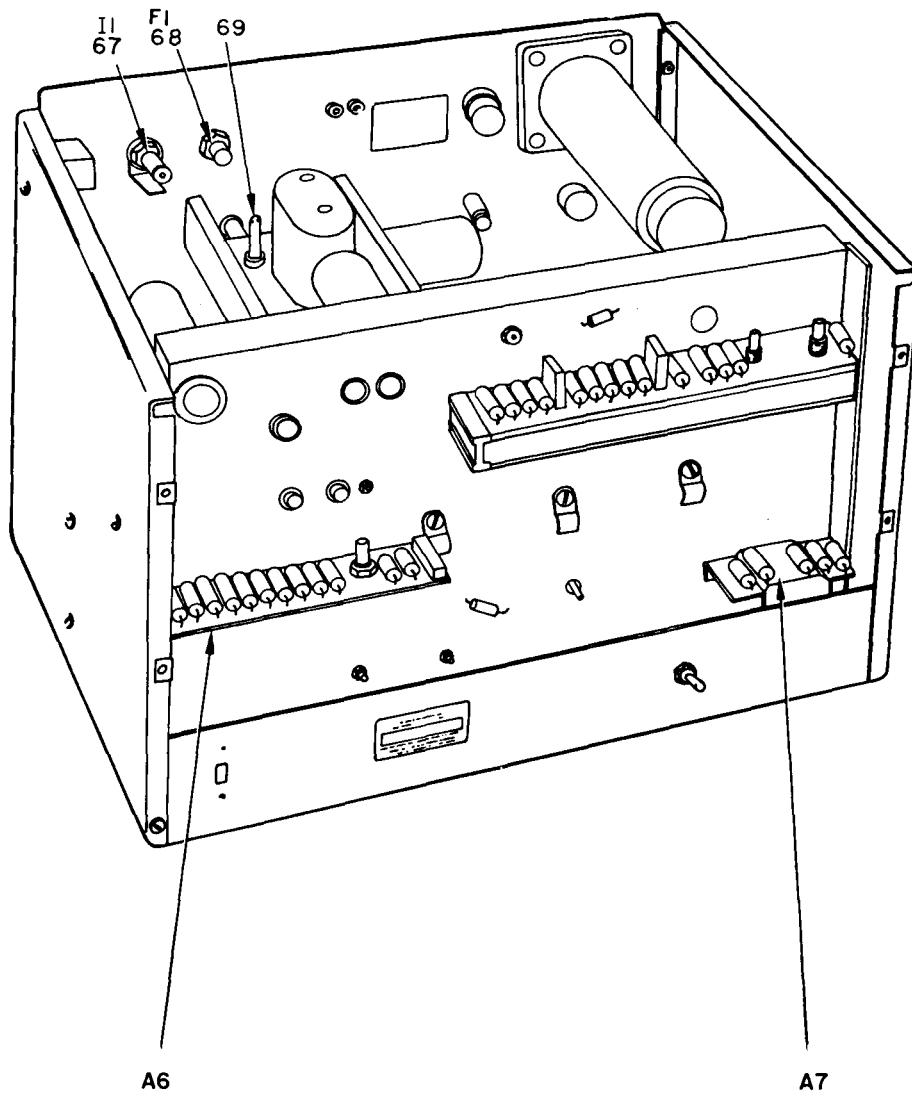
Frequency Comparator CM-77A/USM, exploded view (Sheet 2 of 3).
